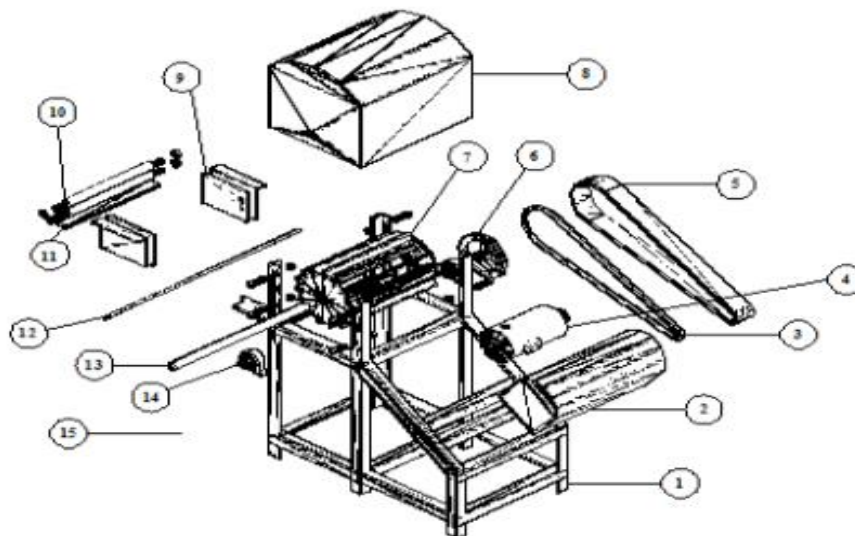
Exploded view of the fabricated plantain fibre extraction machine
